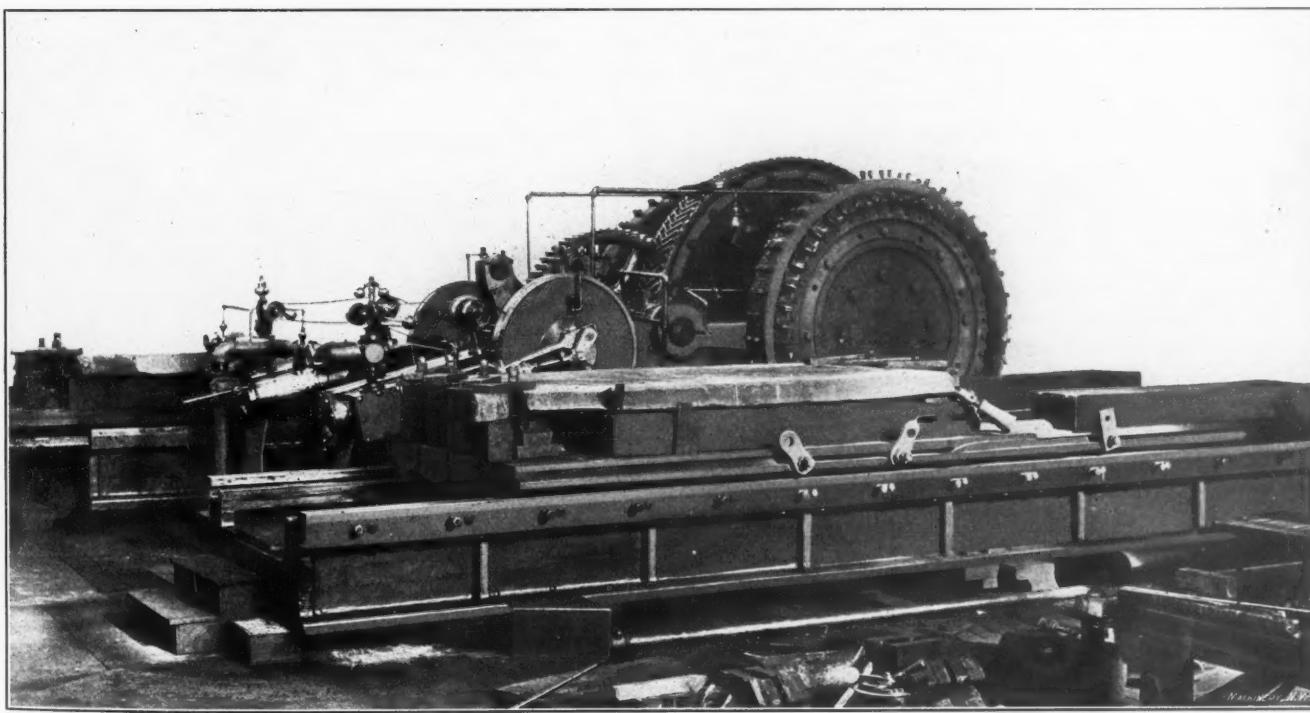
Double, Steam-driven Rotary Planer, for Finishing the Edges of Armor-plate Sections.
